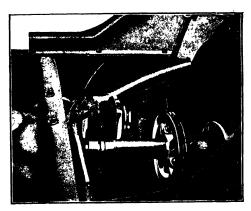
Clutch shaft drive on the 25-5-H.P. 1912 Renault. The outline of dynamo is shown in "ghost" behind the exhaust pipe, clutch fork, etc.
